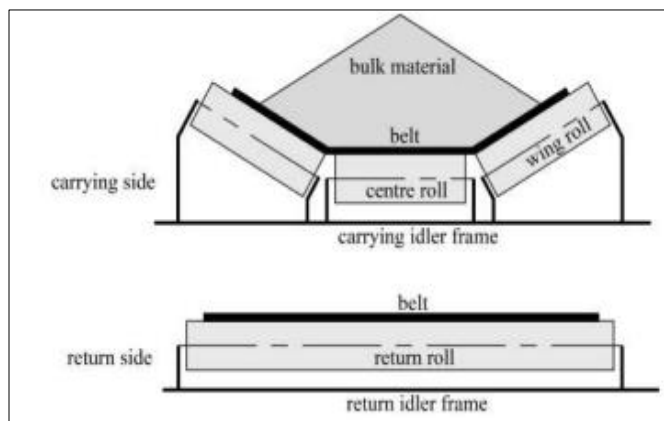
Basic drawing of a conveyor idler troughing set [7]
